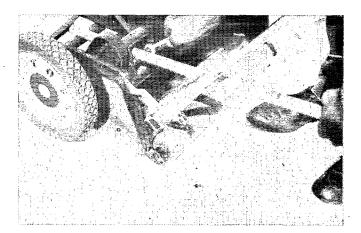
While holding it up in this position, retighten the four countershaft bolts securely. Be sure you do not get the chain too tight as this will cause excessive wear.
